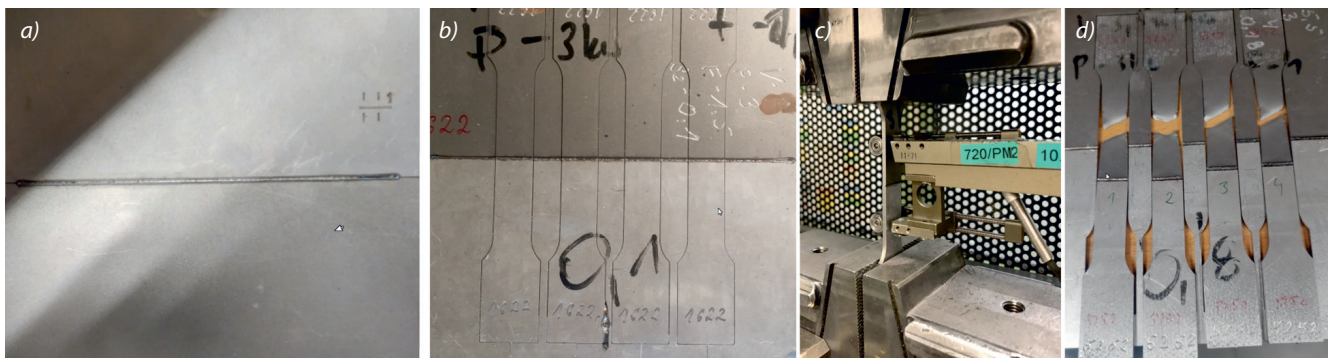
Tensile test: a) blanks after welding, b) samples cut from the blanks, c) testing machine, d) samples after stretching
